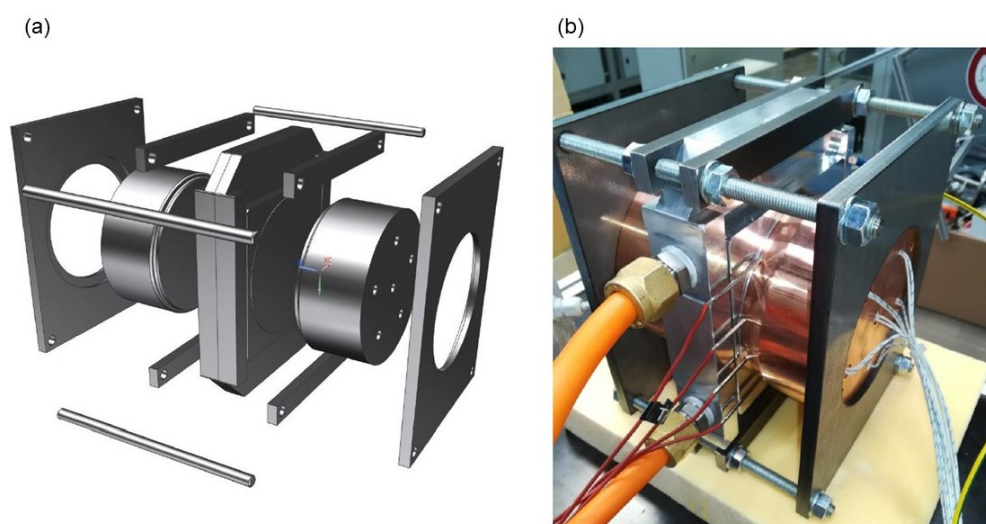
(a) An explosion view of the heat sink and heating blocks used in this investigation and (b) a photograph of the heat sink and heating blocks used in the experimental investigation.
